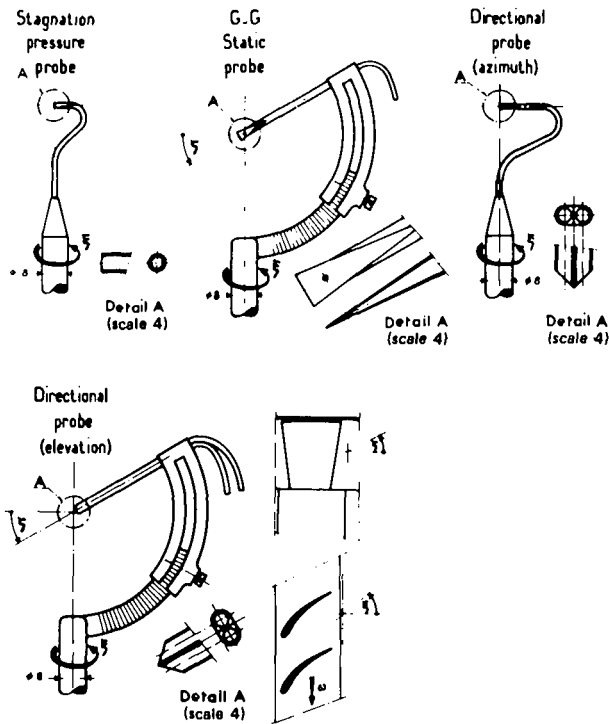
(a) Probes used on the support solid with the rotor (all dimensions in mm)
